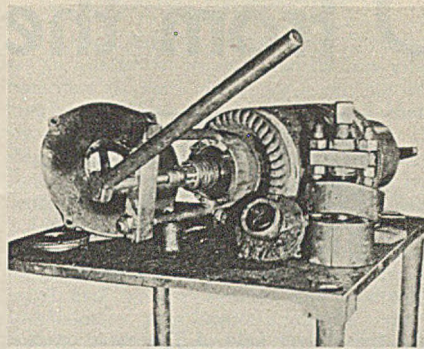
Puller for Removing Bearing and Brass Oil Sleeve
